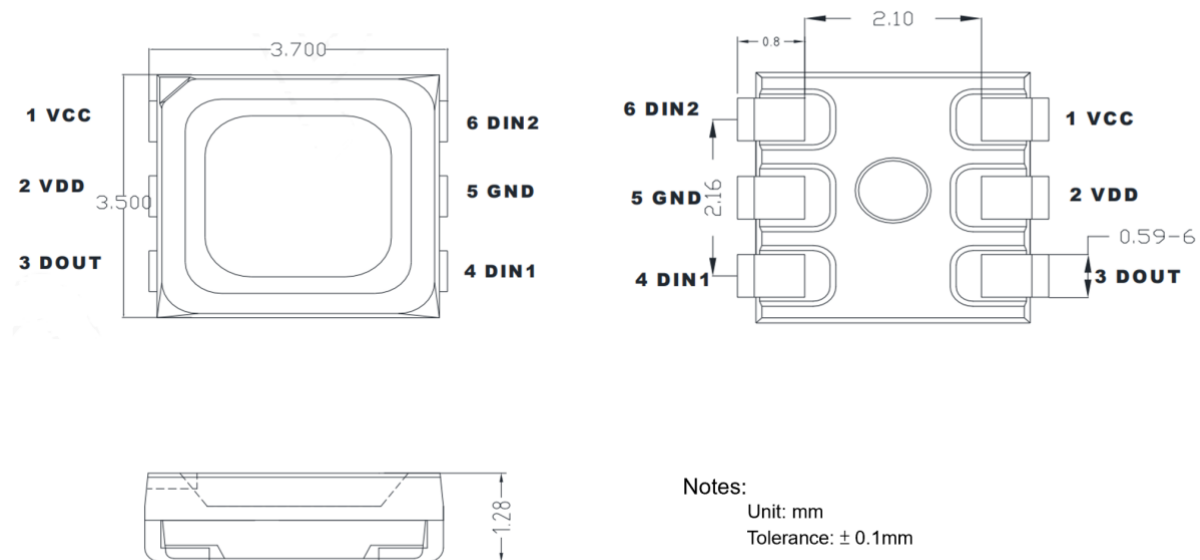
IN-PI33TCTPRGPB Package Outline Dimensions
